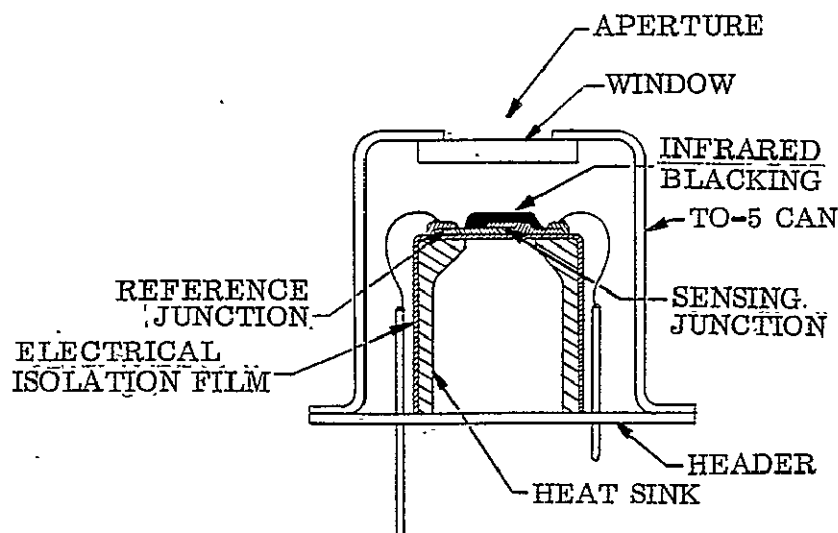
Section View-Thermopile Detector TO-5 Package
